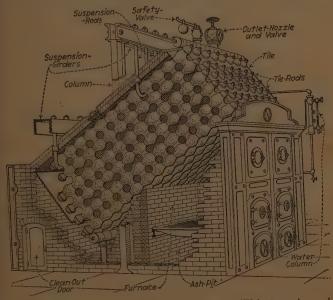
The Harrison spherical section boiler. (This type is no longer built.)
